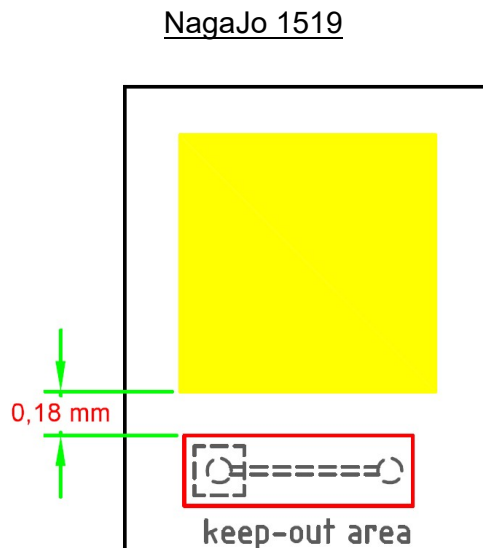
Recommended LED Pick & Place Pipette Size And Pick Up Position For NagaJo 1519
